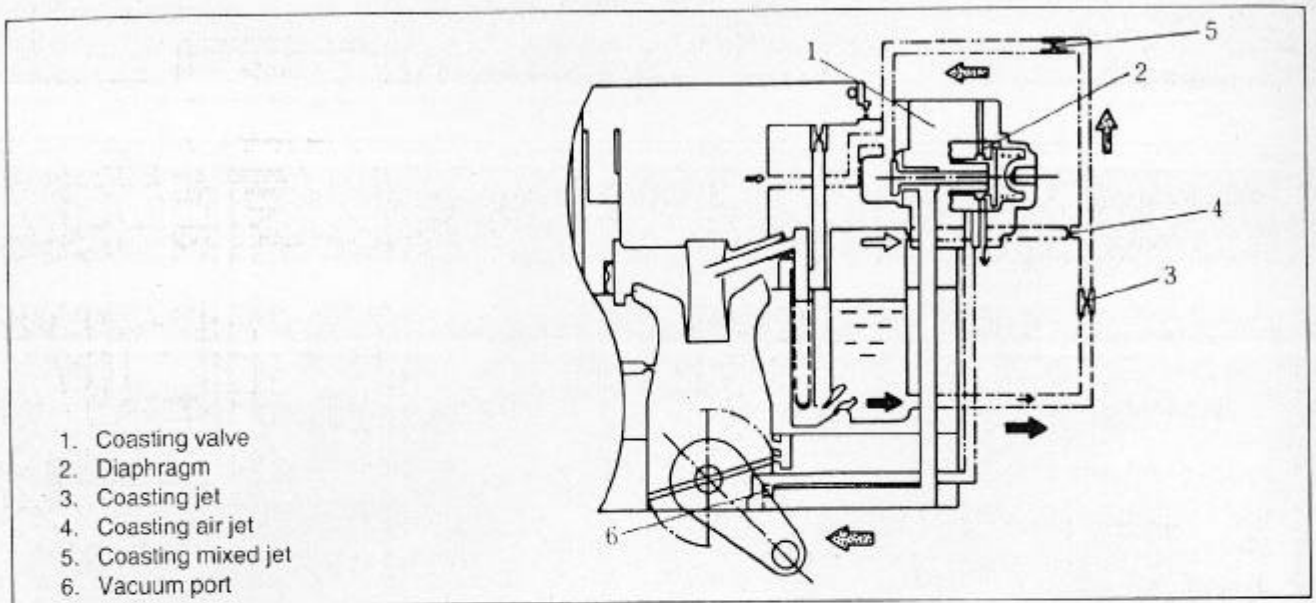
D — 14 OPERATION OF COASTING VALVE SYSTEM
